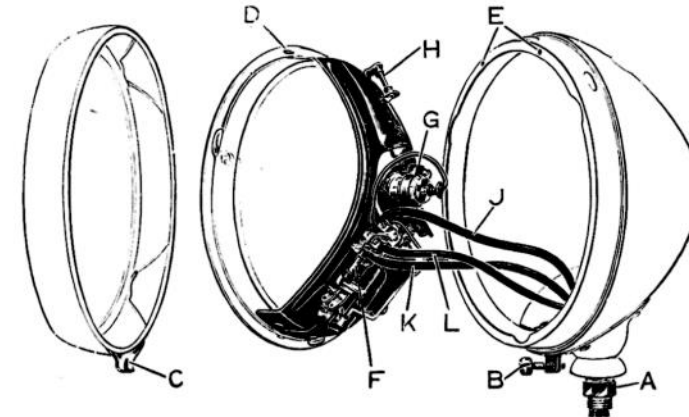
Typical Lucas Head Lamp with "Dip and Switch" Reflector, Dismantled.
